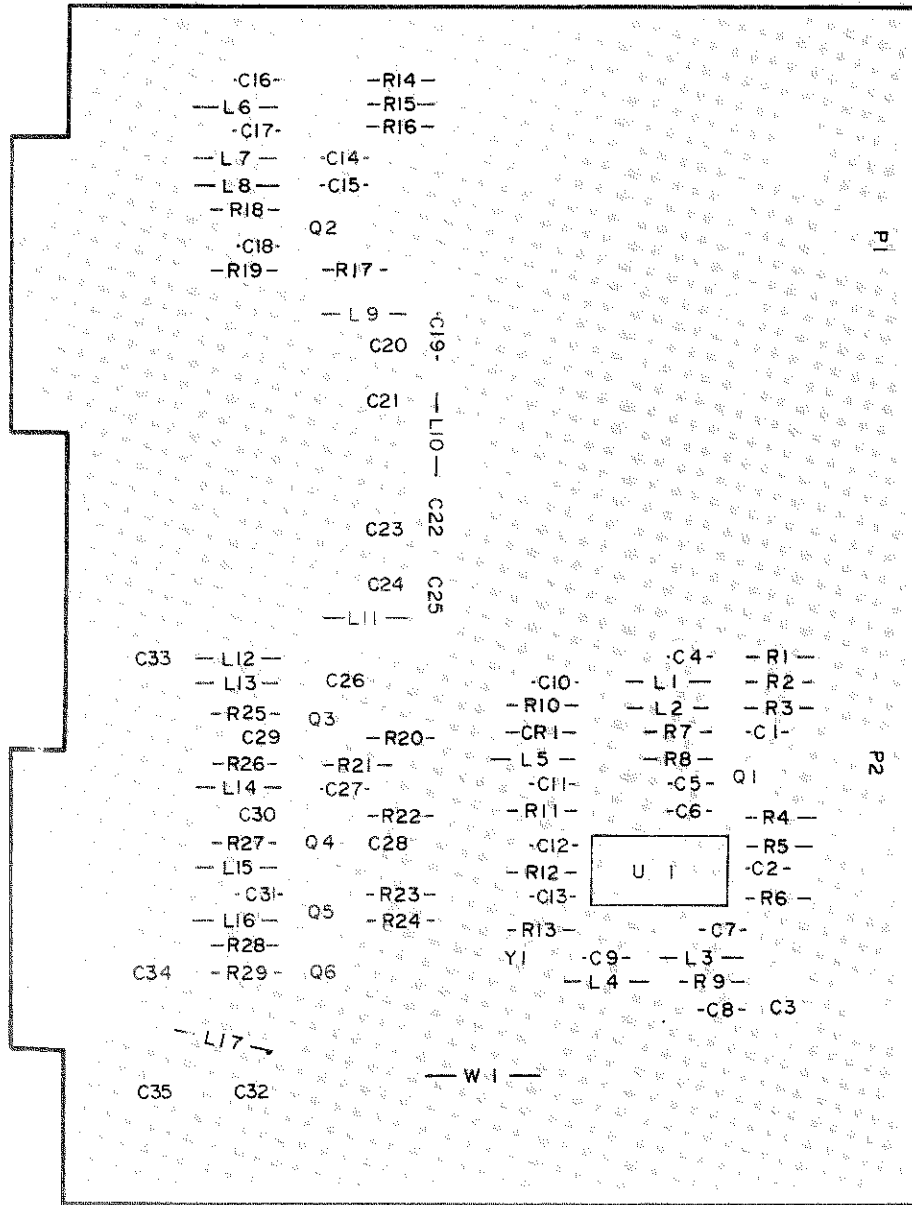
A18 100MHz Clock Generator/Doubler Board Assembly Component Locations.
